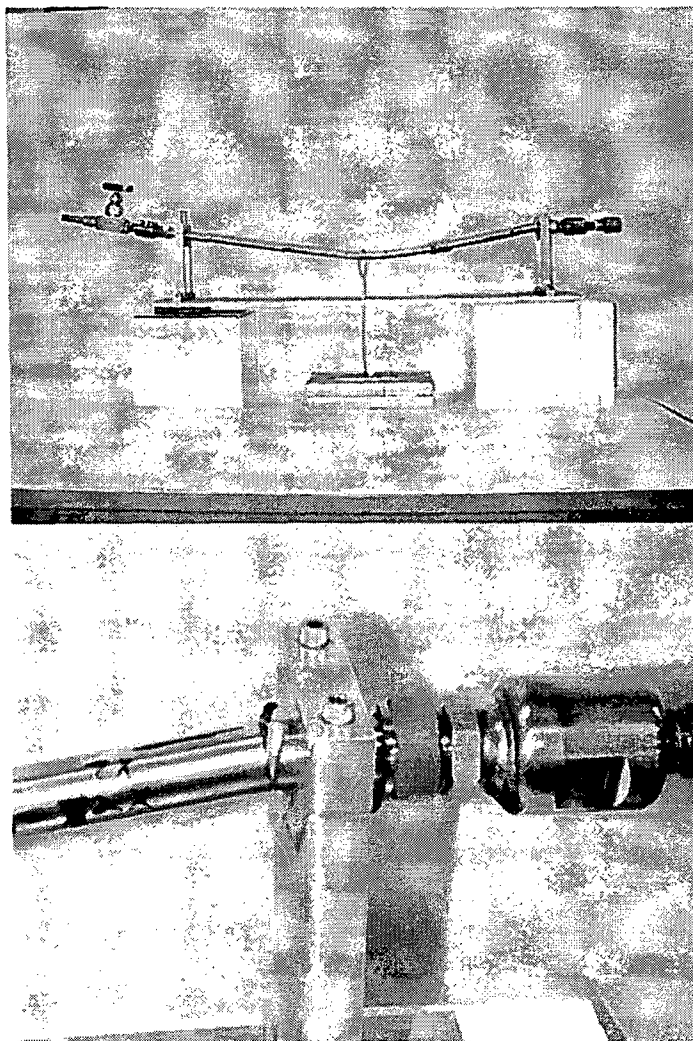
Post-test view of specimen with circumferential flaw and closeup view of end of tube with the notch.
